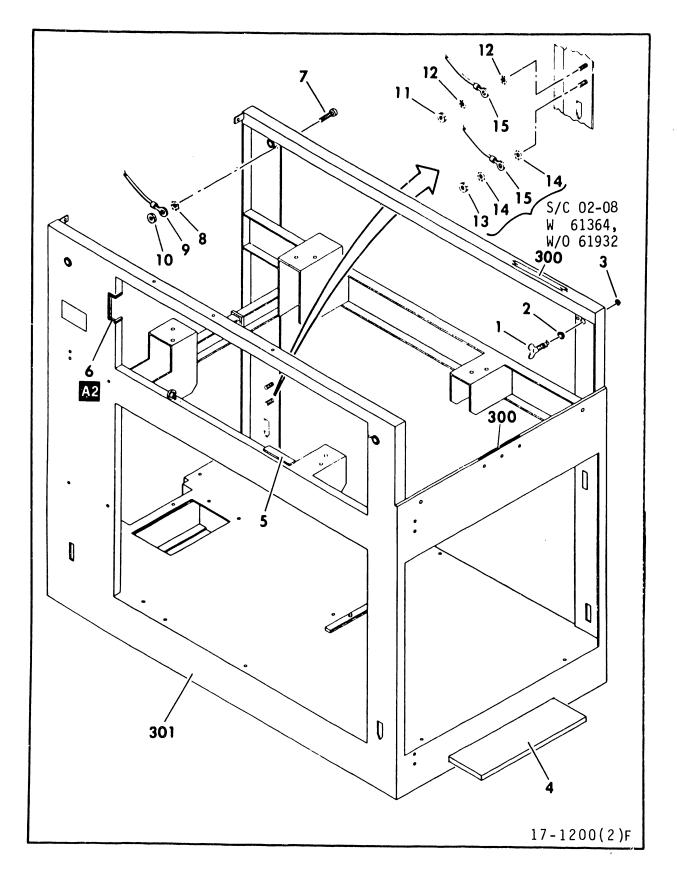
A-12. Frame & Air Assembly (Sheet 2)
